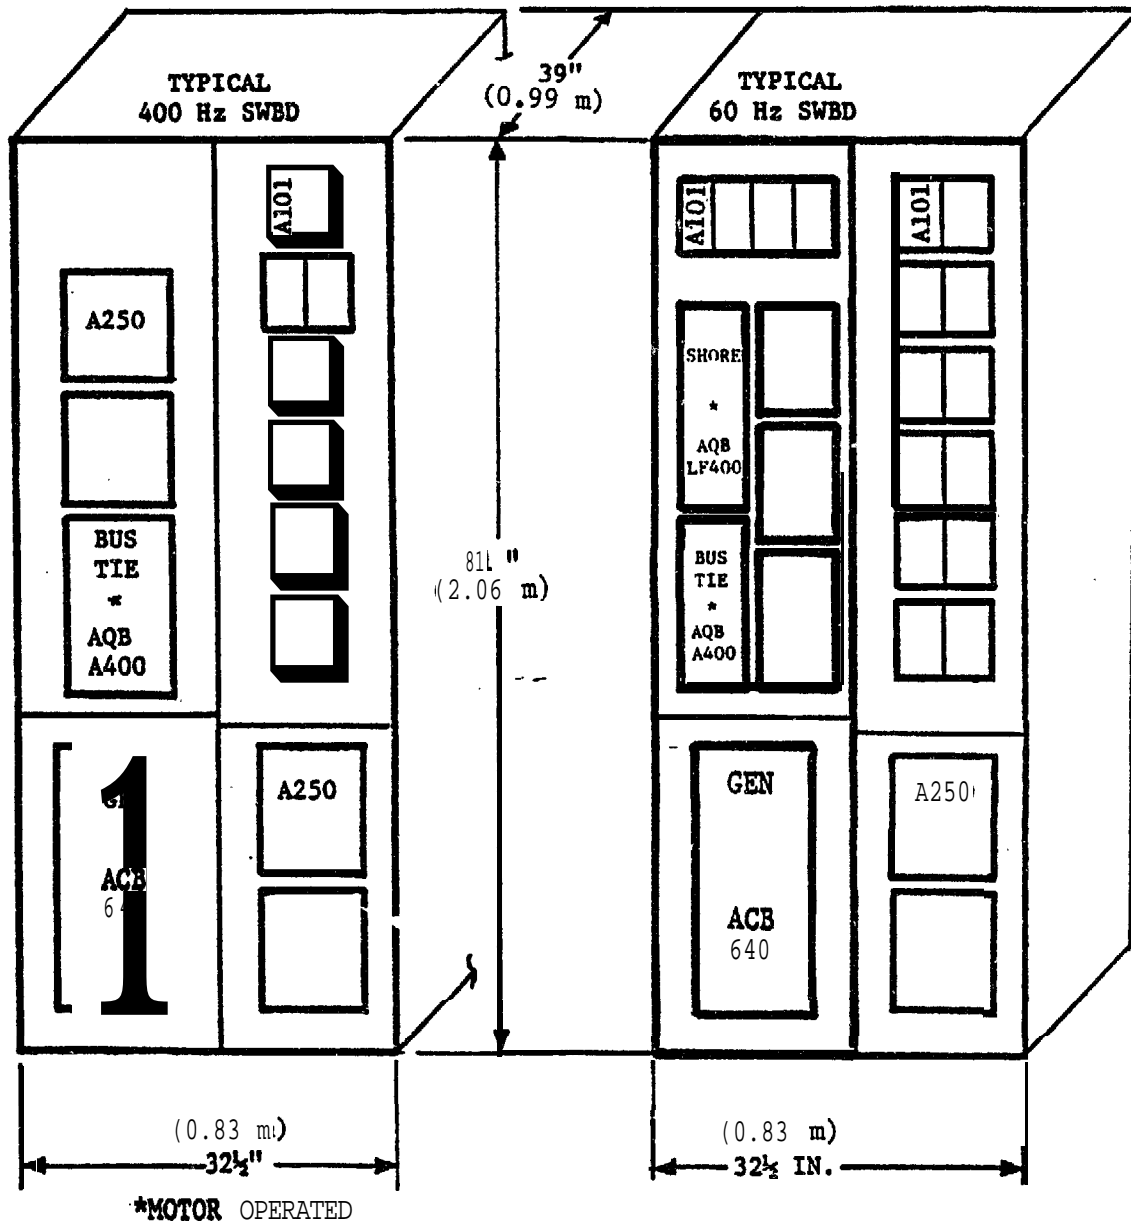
(U): Switchboard Arrangement (Typical) (U)
